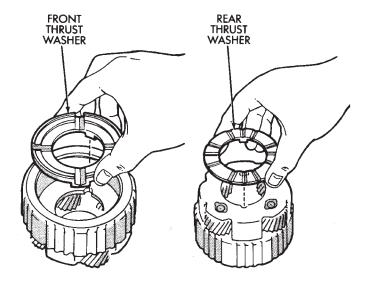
Removing/Installing Rear Planetary Thrust Washers
